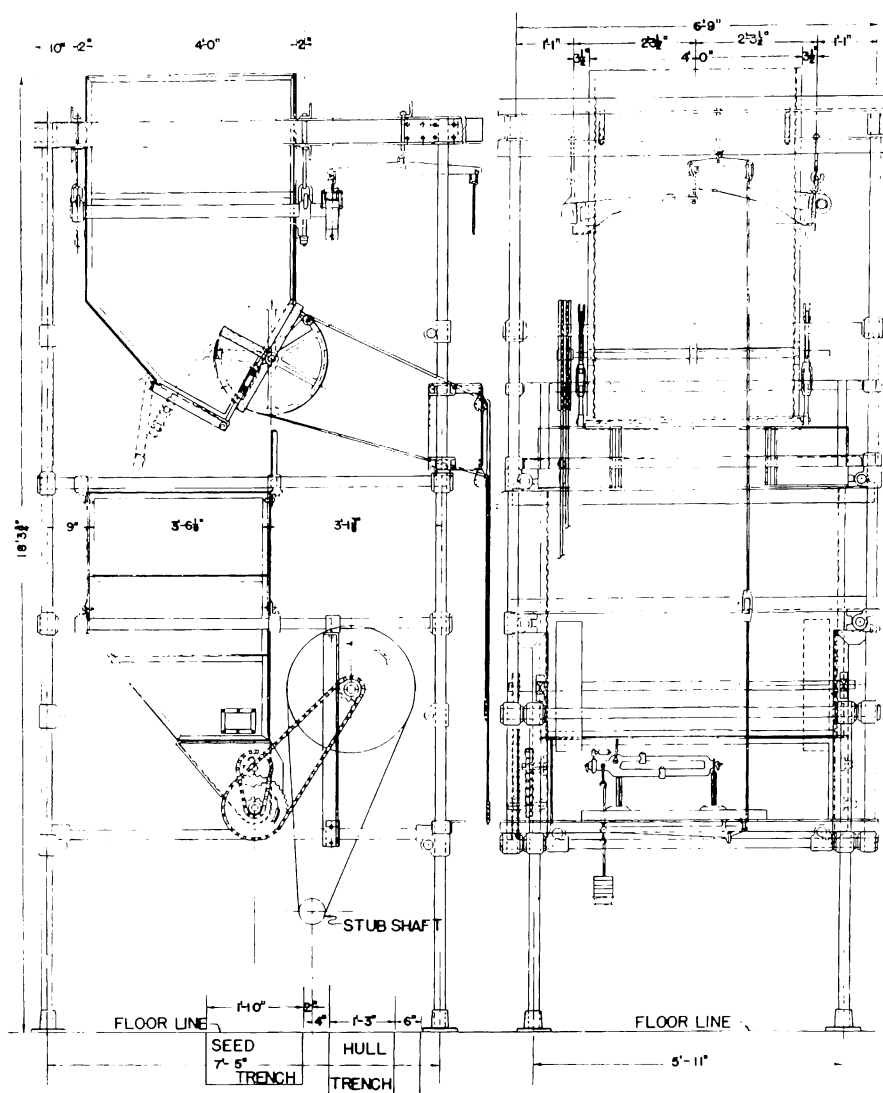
Line drawing giving dimensions of cottonseed scales.
